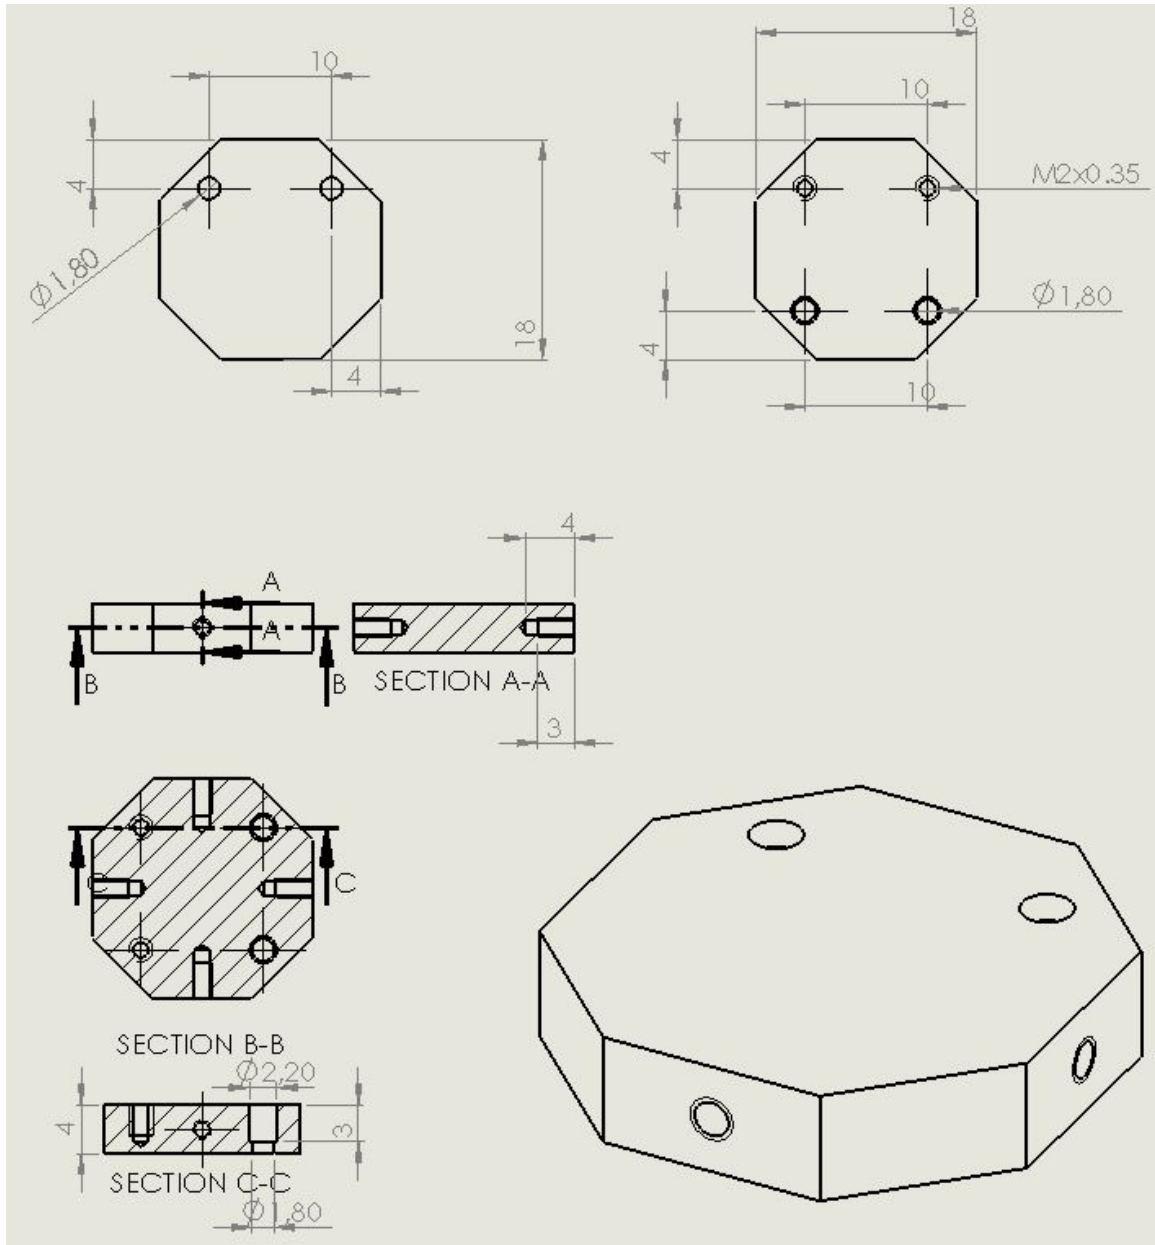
Solidworks model drawing of the base plate of the inner frame of the cryostat holder
